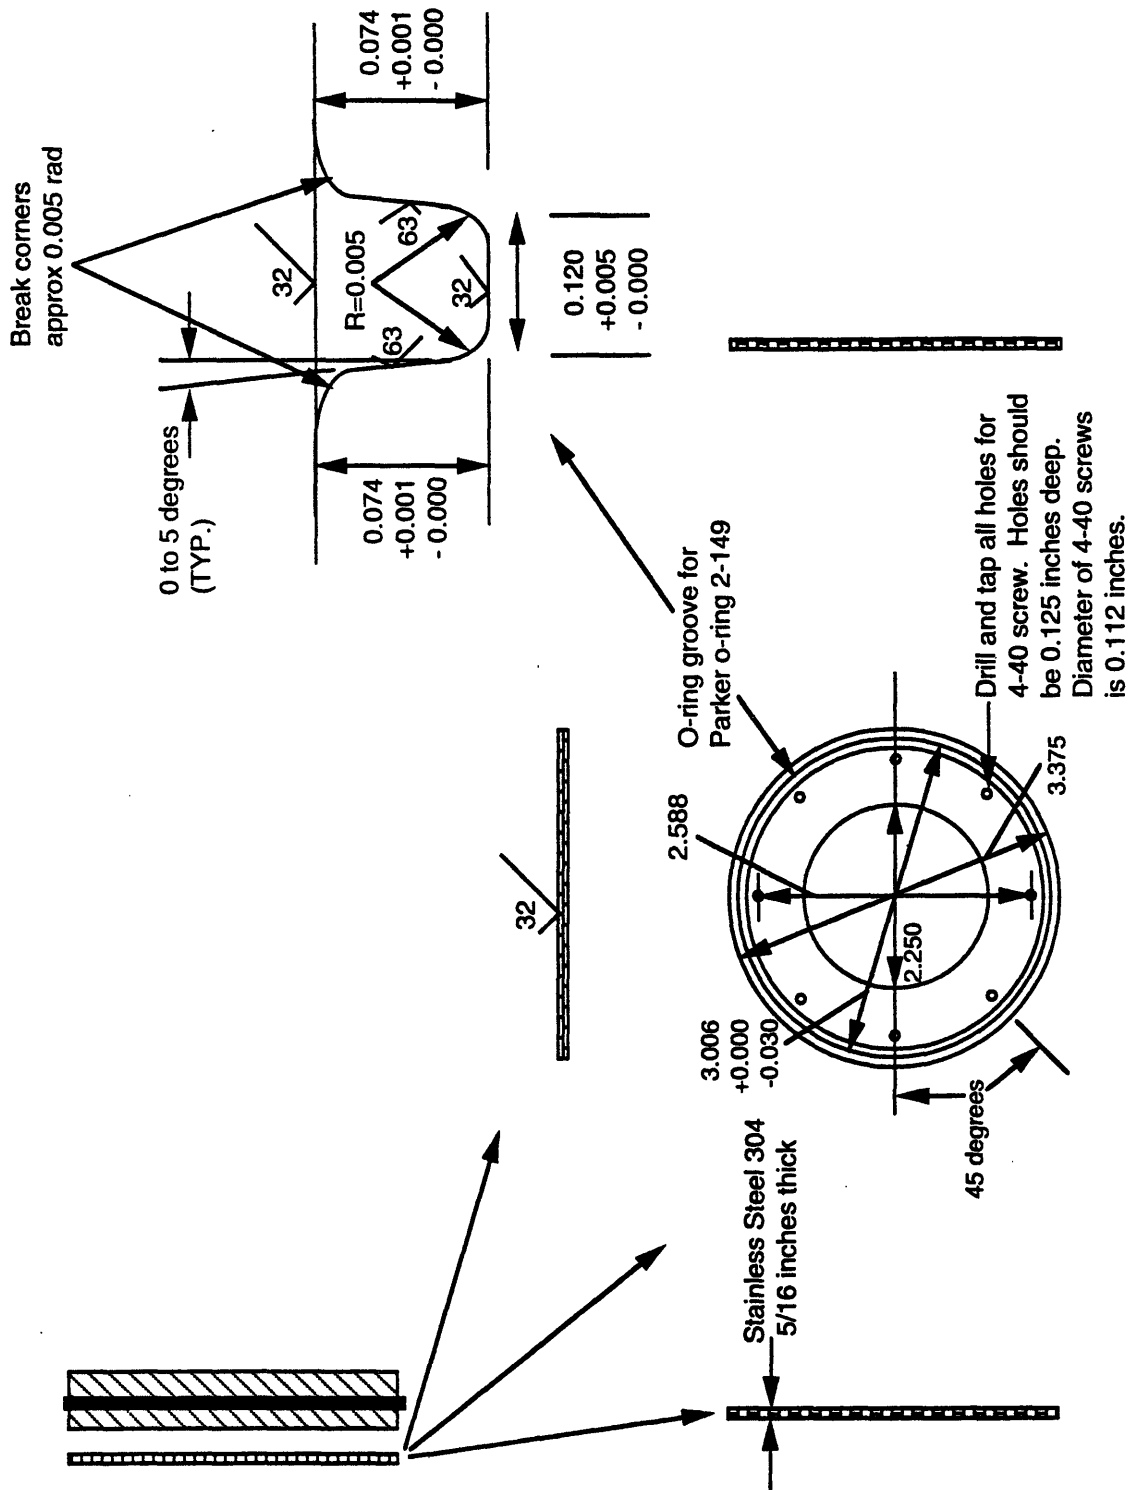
Stainless Steel Ring for Stainless Steel Pipe Flanges
